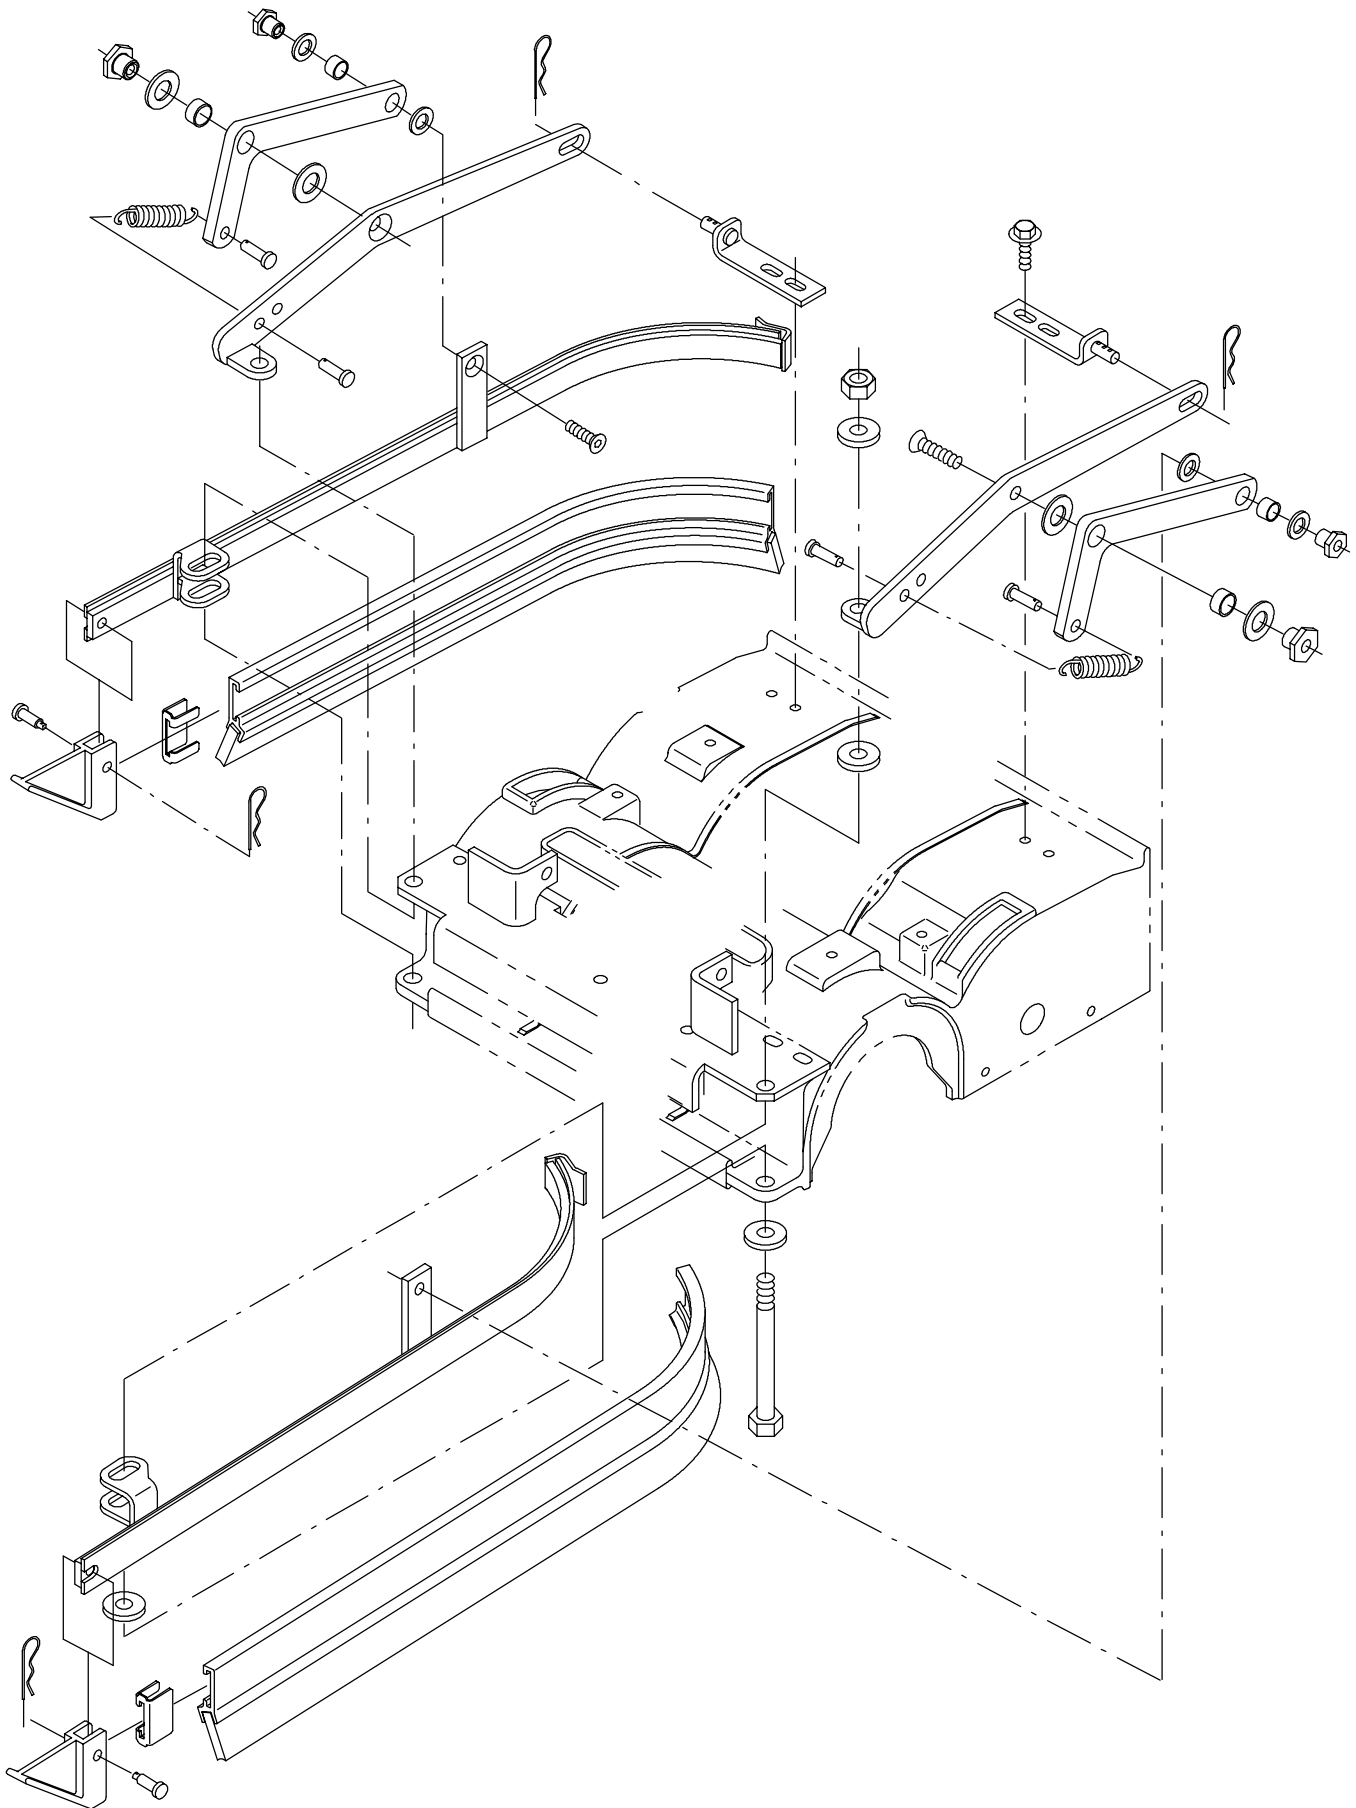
Cylindrical Scrub Head Squeegee Group
